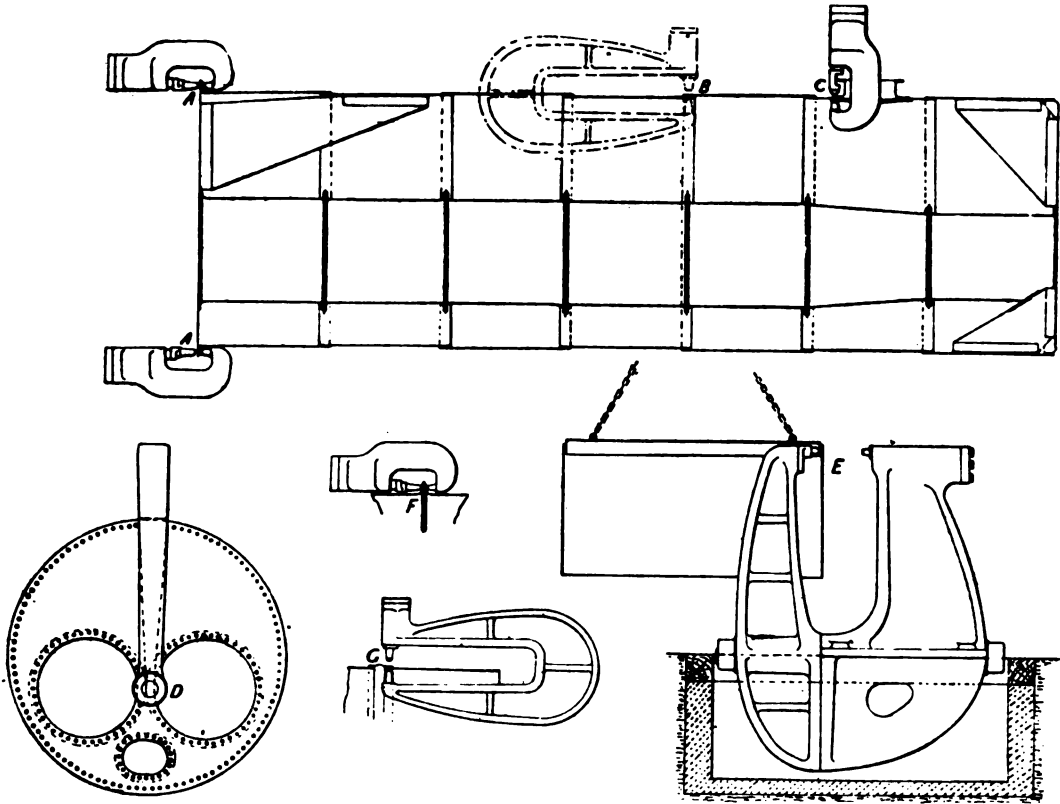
Hydraulic Riveting Applied to Lancashire and Cornish Boilers.
